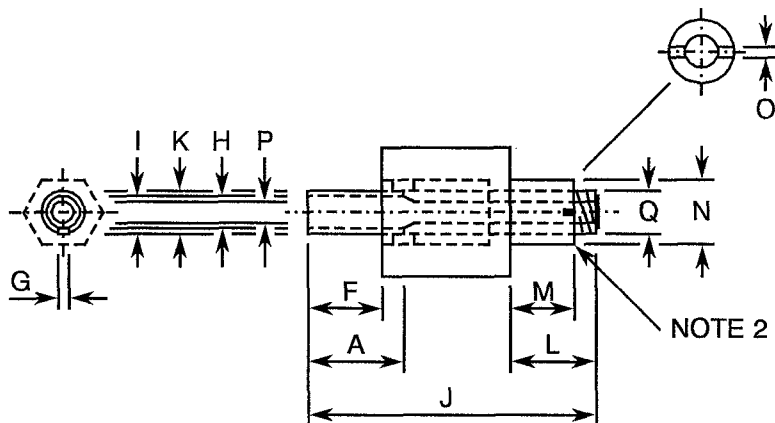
PHYSICAL DIMENSIONS(CONTINUED)
